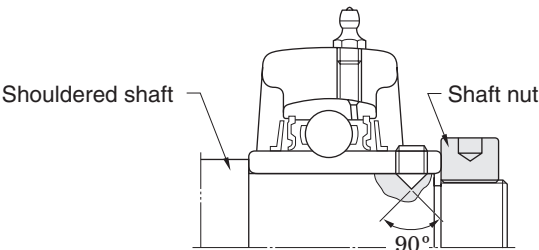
Example of installation with a shouldered shaft and shaft nut
